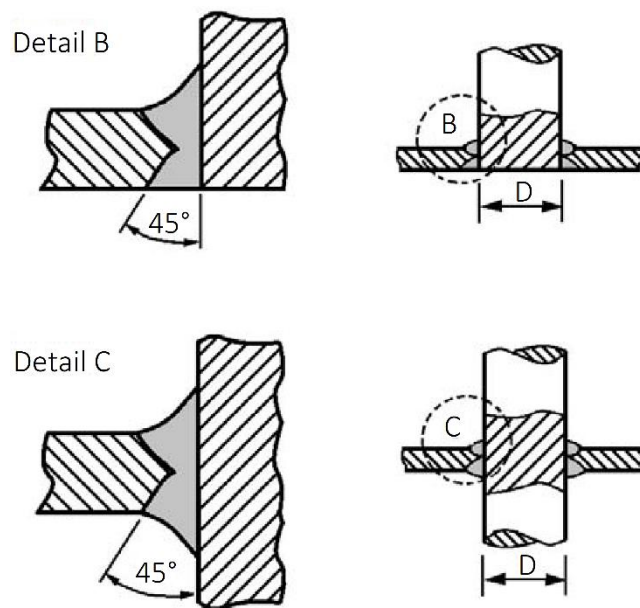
Welded joint between rudder shaft and coupling flange for small stock diameter.
